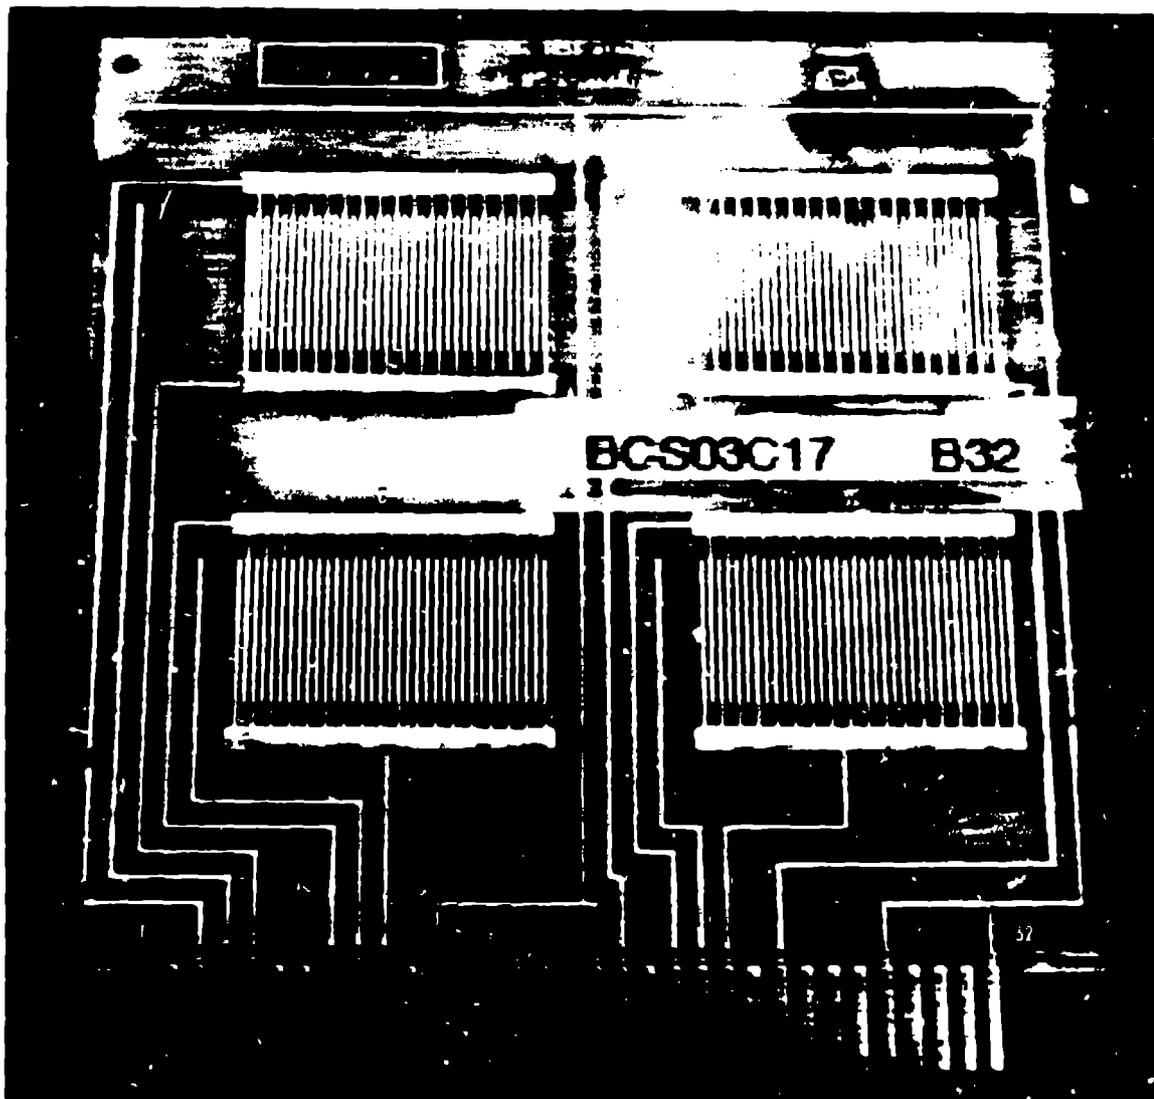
IPC B-24 PWB Used For Surface Insulation Resistance Testing
